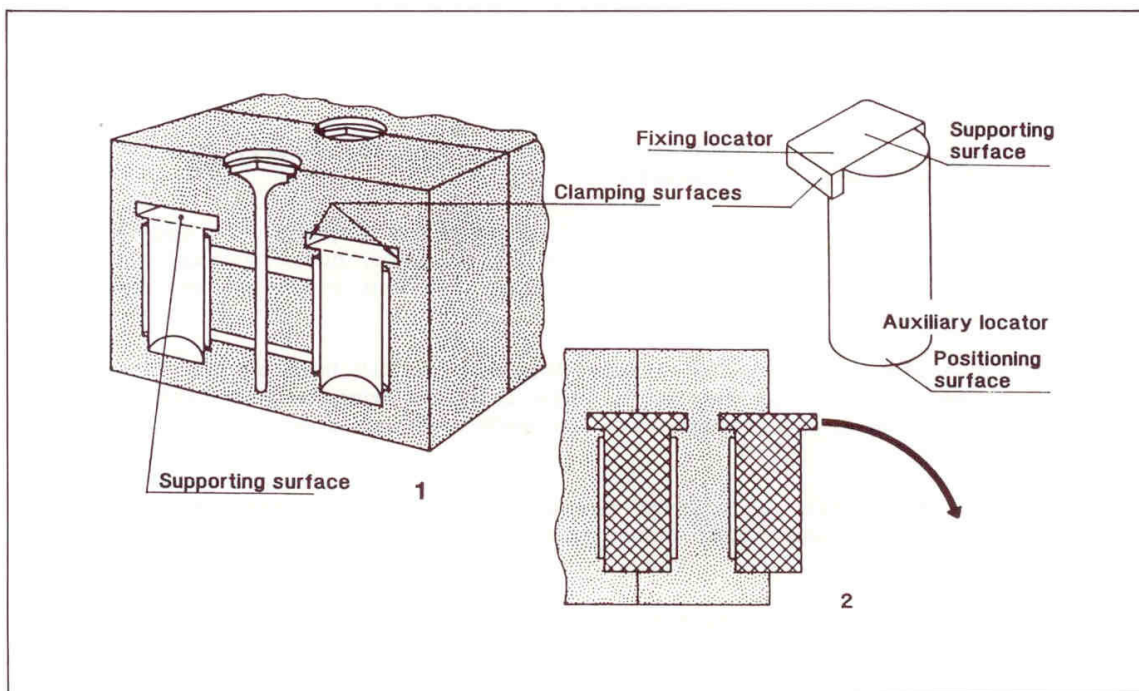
When the core is inserted in the mold, the clamping surfaces of the locator keep the core in position by crush fit (1) and prevents the core from shifting out (2)
